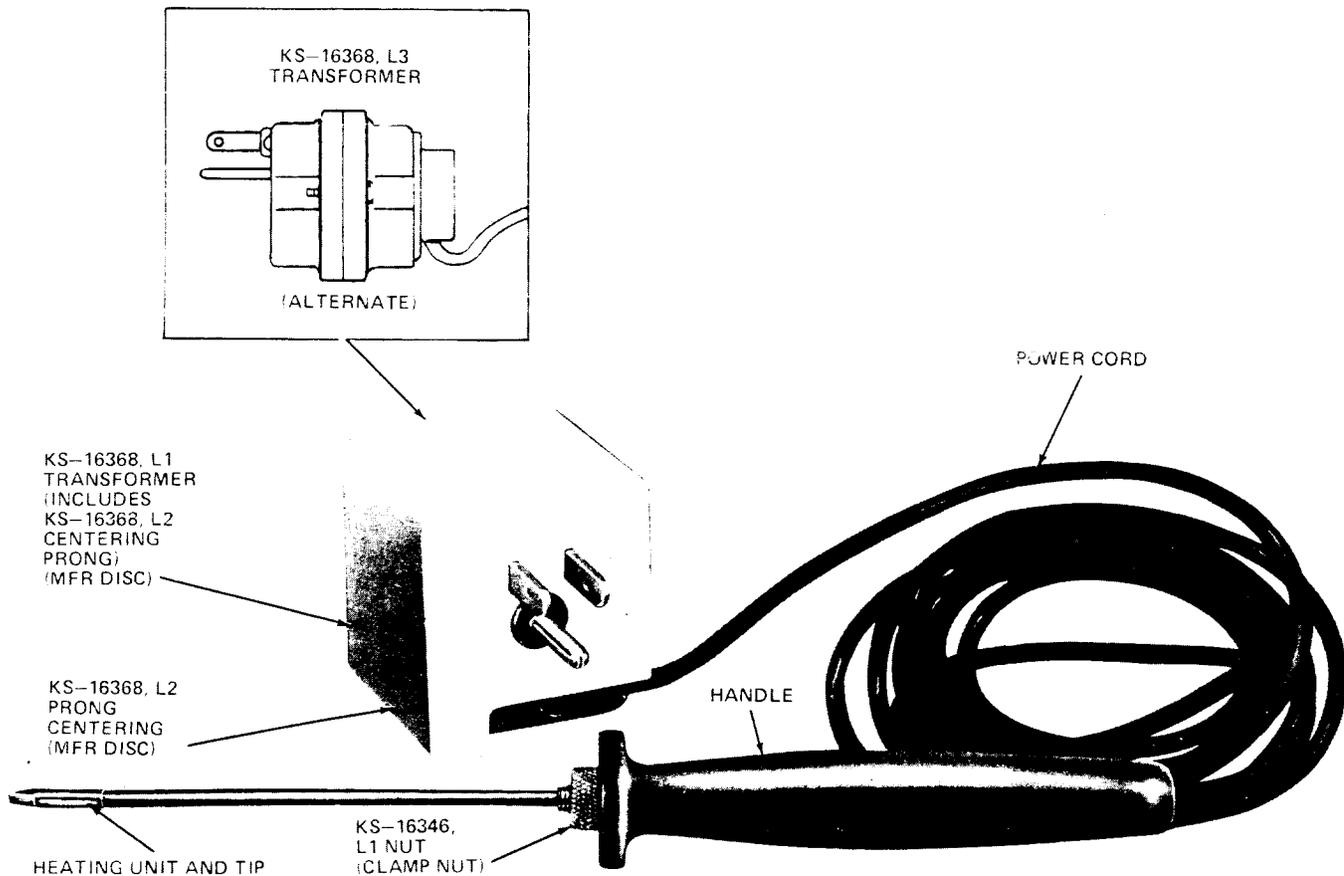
KS-16346, L2, Soldering Iron and KS-16368, L1, Transformer
